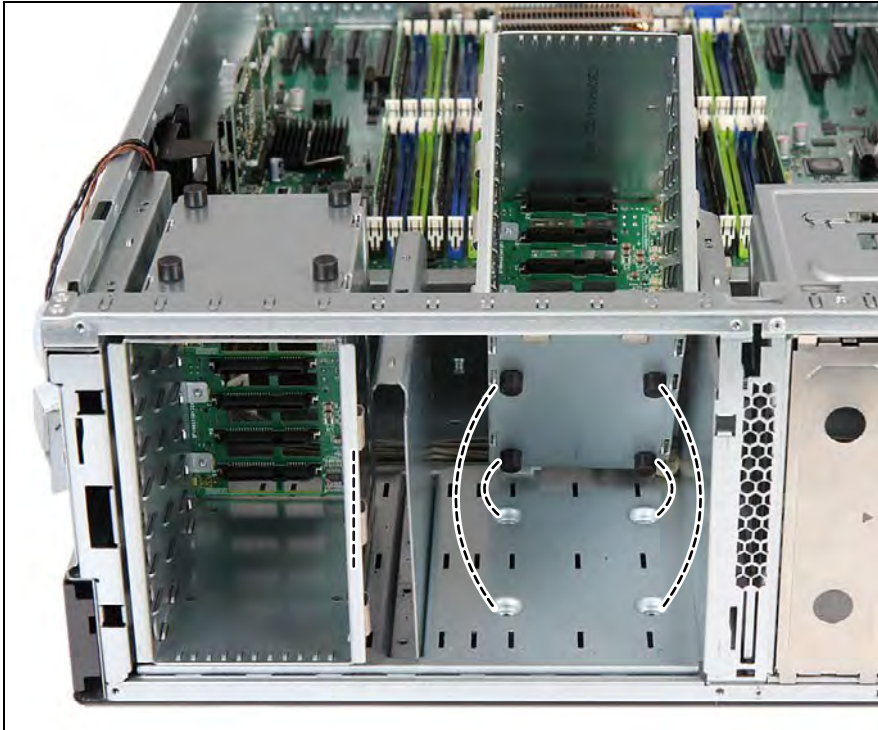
Mounting the second 2.5-inch HDD drive cage (A)
